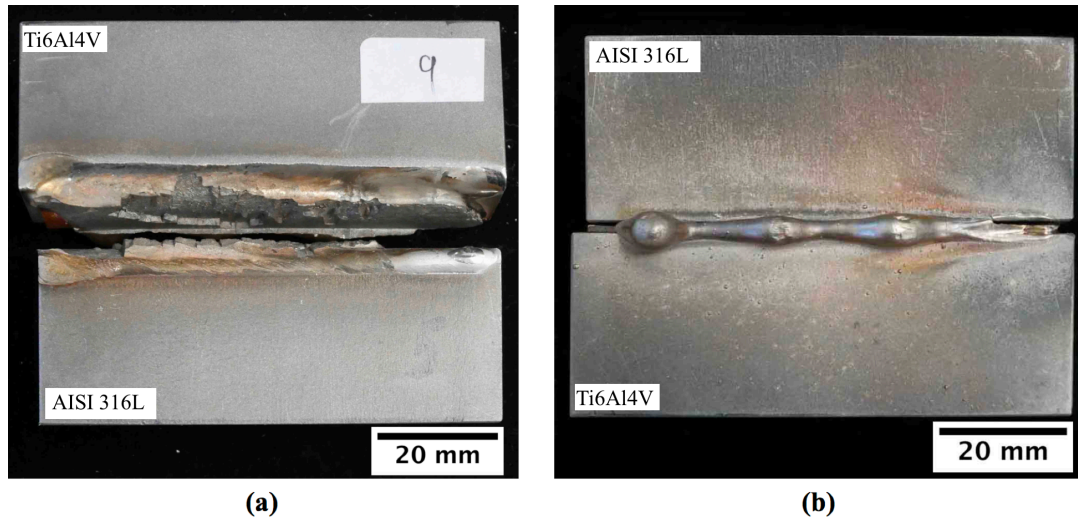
Dissimilar weld 9 (a) weld surface (b) weld root.
